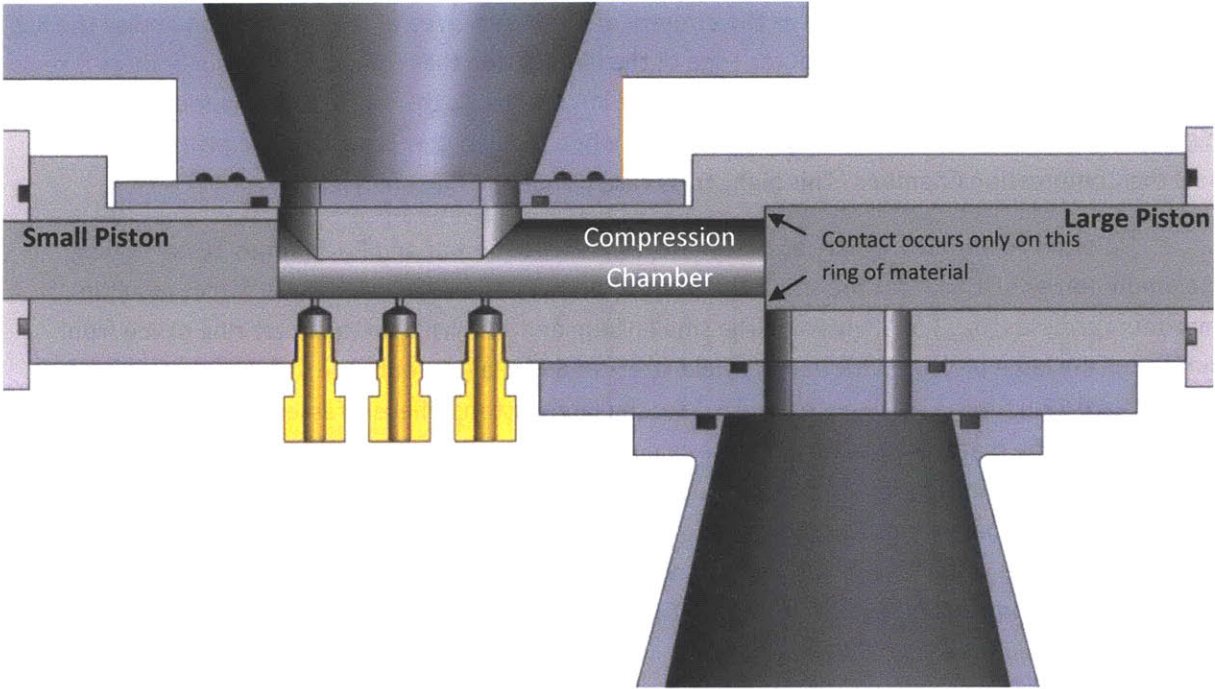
Cross Sectional View of Beta Prototype Showing the Pistons in the Loading Position
